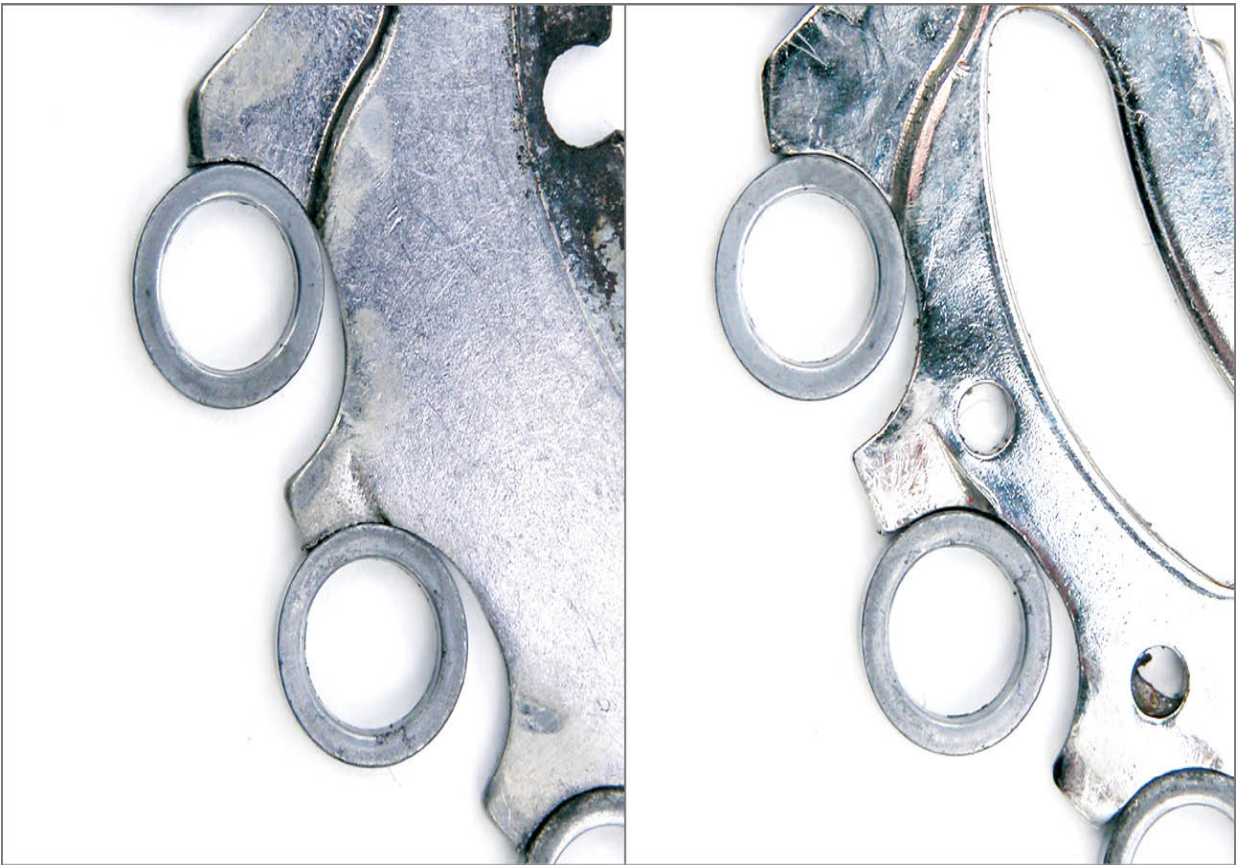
Left: chain rollers sitting in a worn sprocket showing poor engagement Right: chain rollers showing good engagement on a new sprocket
